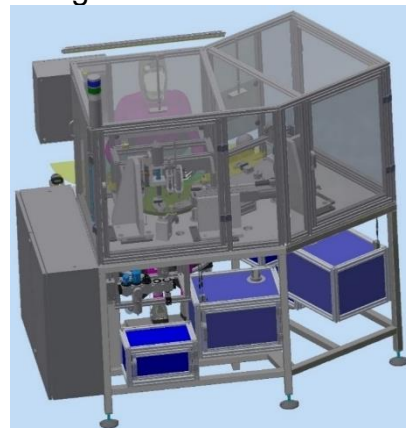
System for assembly of a unit consisting of a seal, nut, and stud – back view
